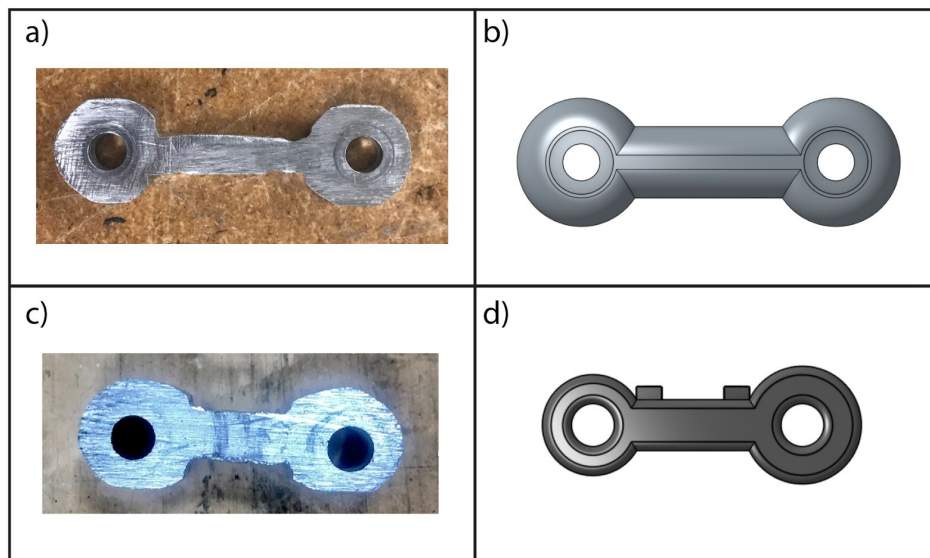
a) machined anterior linkage b) CAD model of the anterior linkage c) machined posterior linkage d) CAD model of posterior linkage
